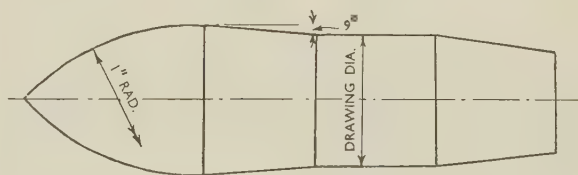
Enlarged Profile of Plug Used for Bull-Block Drawing. (The drawing diameter is equivalent to the required bore of tube.)
